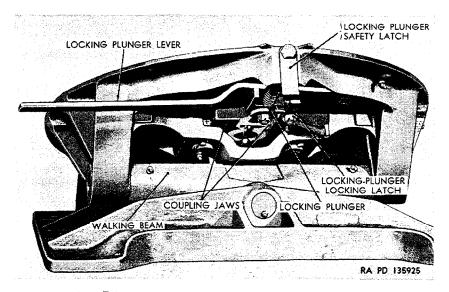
Fifth wheel assembly removed from vehicle-front view.
